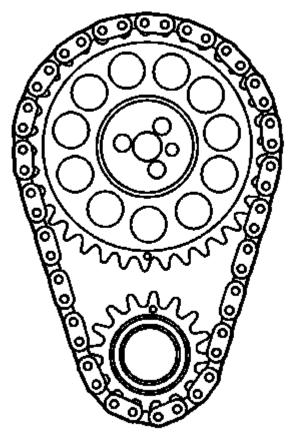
View Of Camshaft & Crankshaft Sprocket Timing Marks Courtesy of GENERAL MOTORS CORP.
